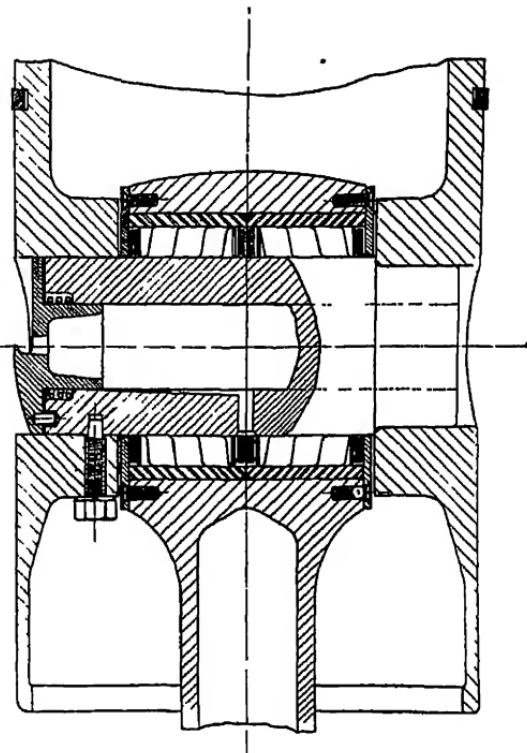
HYATT ROLLER BEARINGS USED FOR SMALL ENDS OF CONNECTING RODS OF LARGE DIESEL ENGINE
